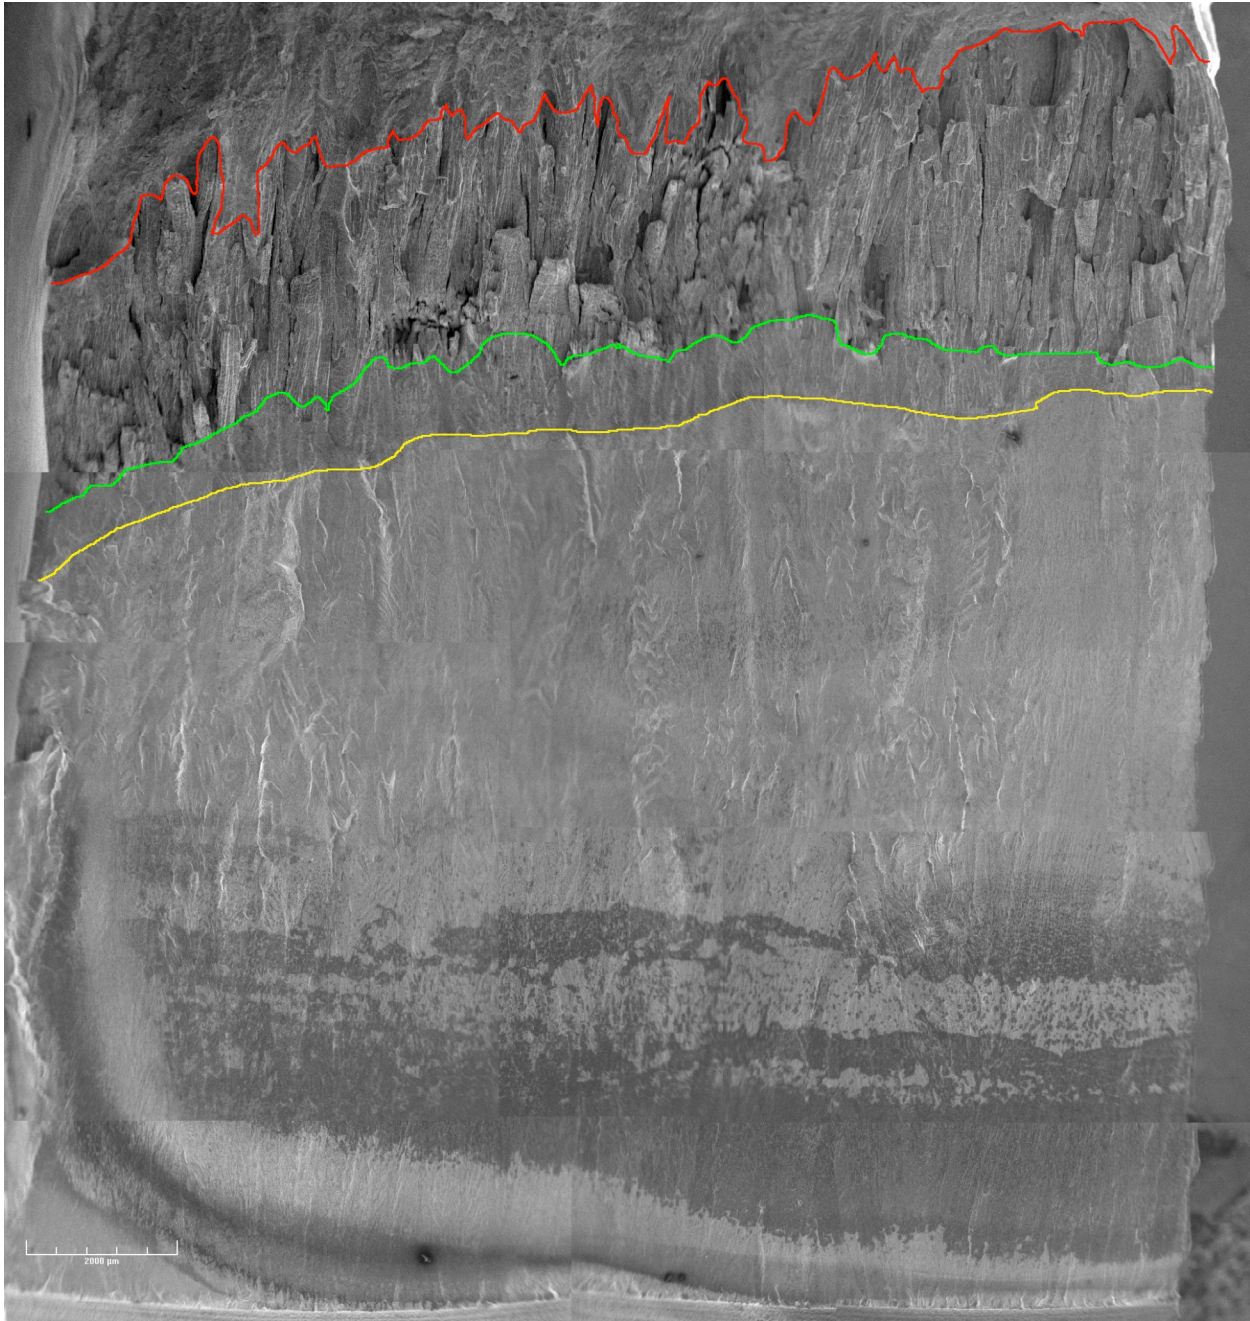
Fracture surface of specimen CT31-W02 TS. Crack extension from bottom to top of the figure.
